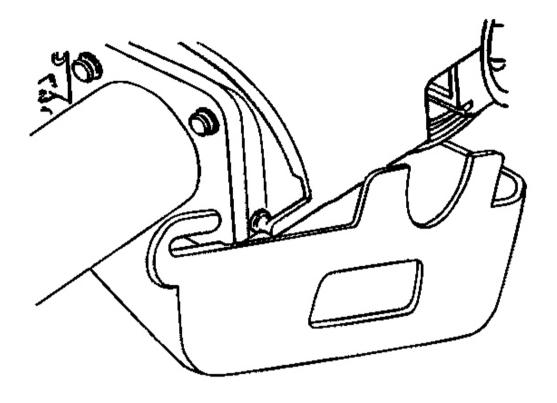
Disengaging Upper Trim Cover Courtesy of GENERAL MOTORS CORP.
